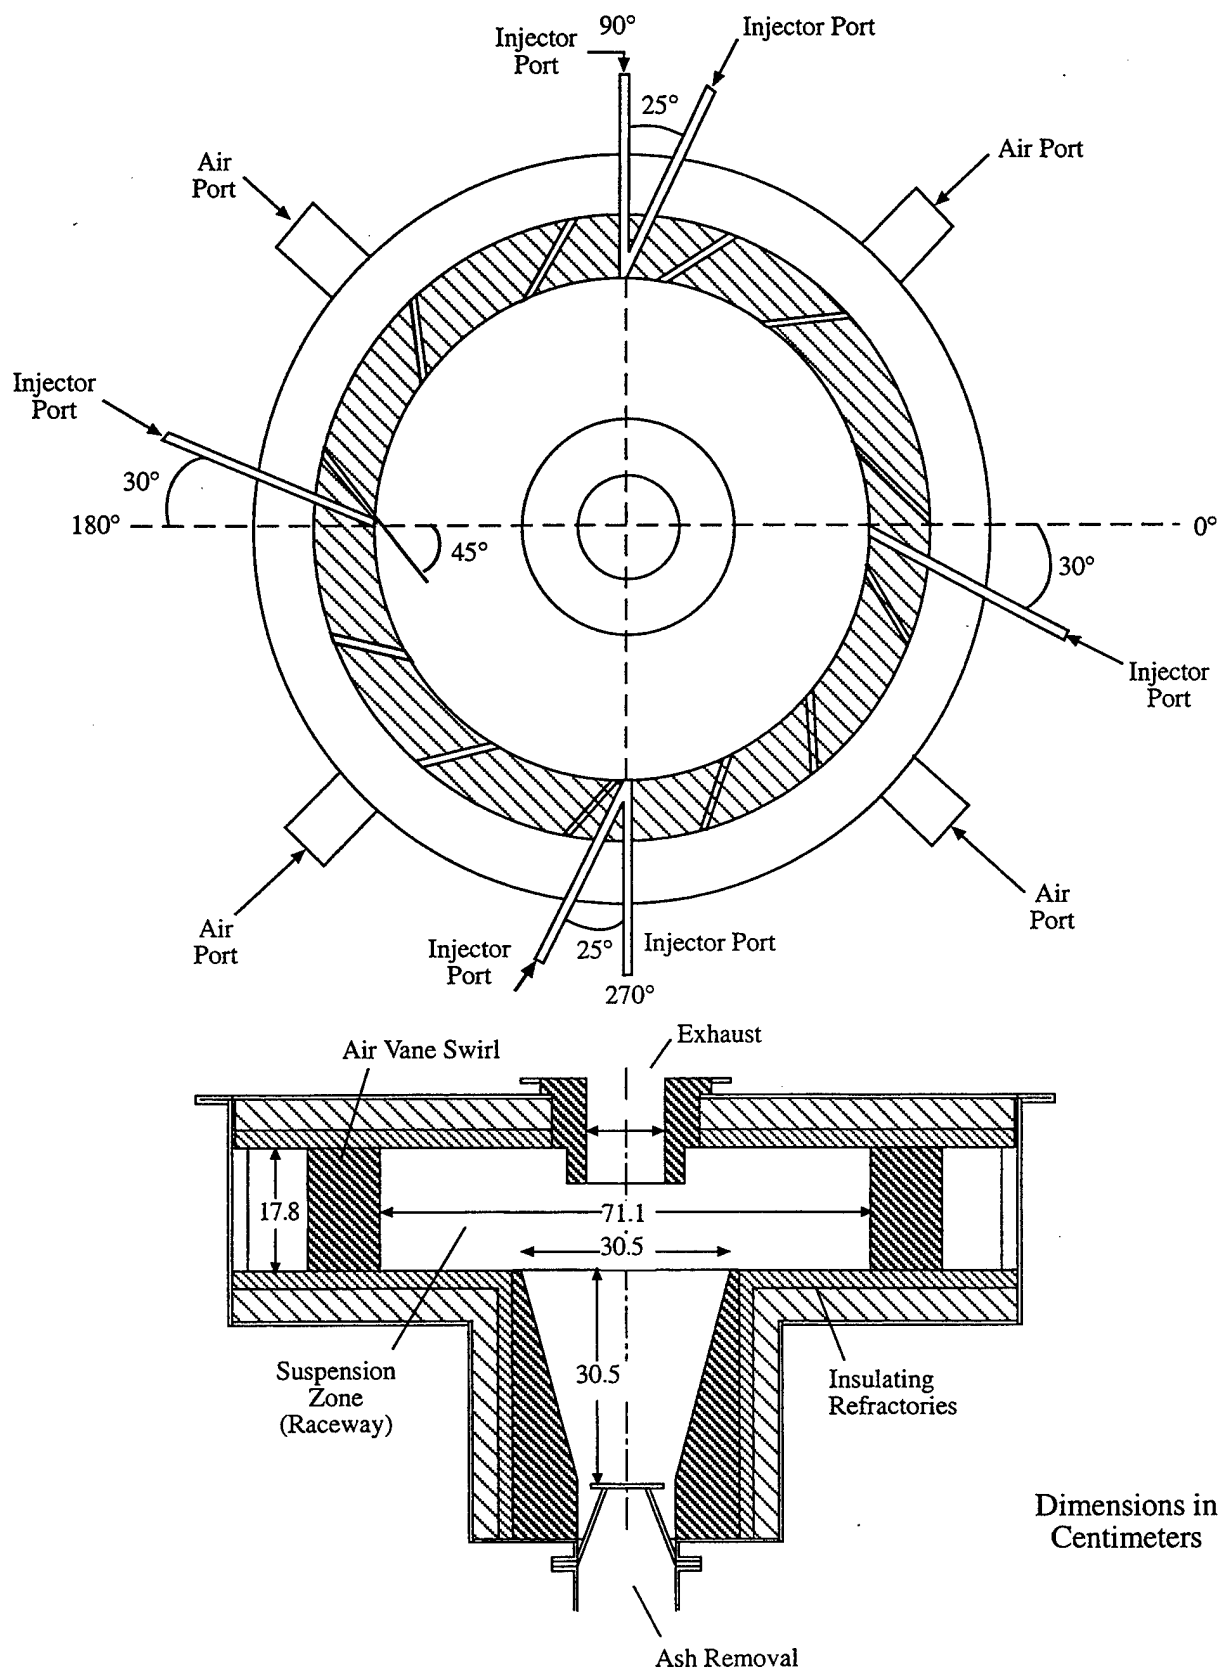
Details of the full-scale VCC dimensions and internal layout. The top view illustrates the injector and air port locations (above). The insulation and internal dimensions are shown in the side view (below).
